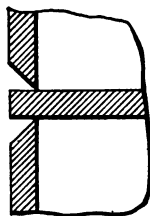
Inserting an intermediate head by cutting the cylinder into two sections.
